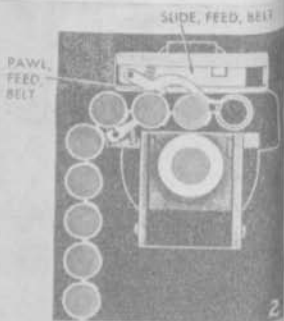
Action of belt feed pawl, and belt holding pawl, bolt recoiling.
